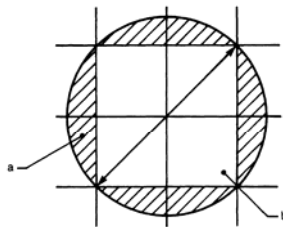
Point b is technically within true tolerance, whereas a is out of tolerance. Obviously, a will produce equally acceptable parts.
